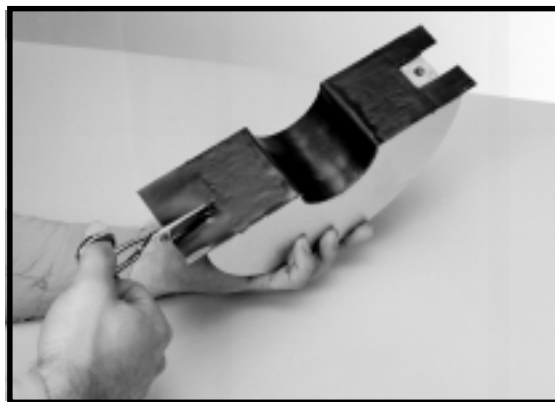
TRIMMING LOCK-TAPE STRIP FROM AROUND BOLT HOLE
